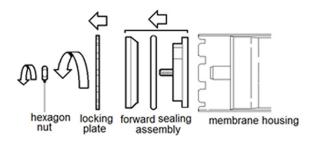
Removal of locking plate and membrane chamber seal assembly
